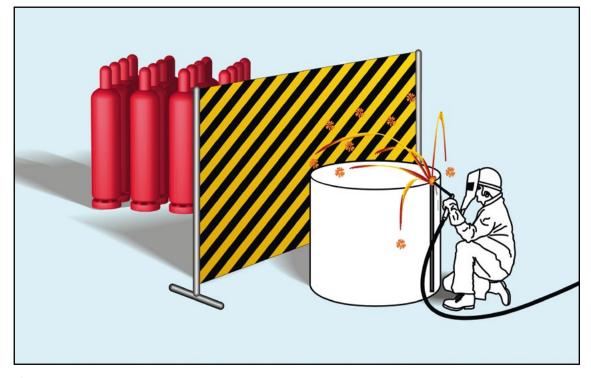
Special protective measures for welding in explosion and fire hazard areas
